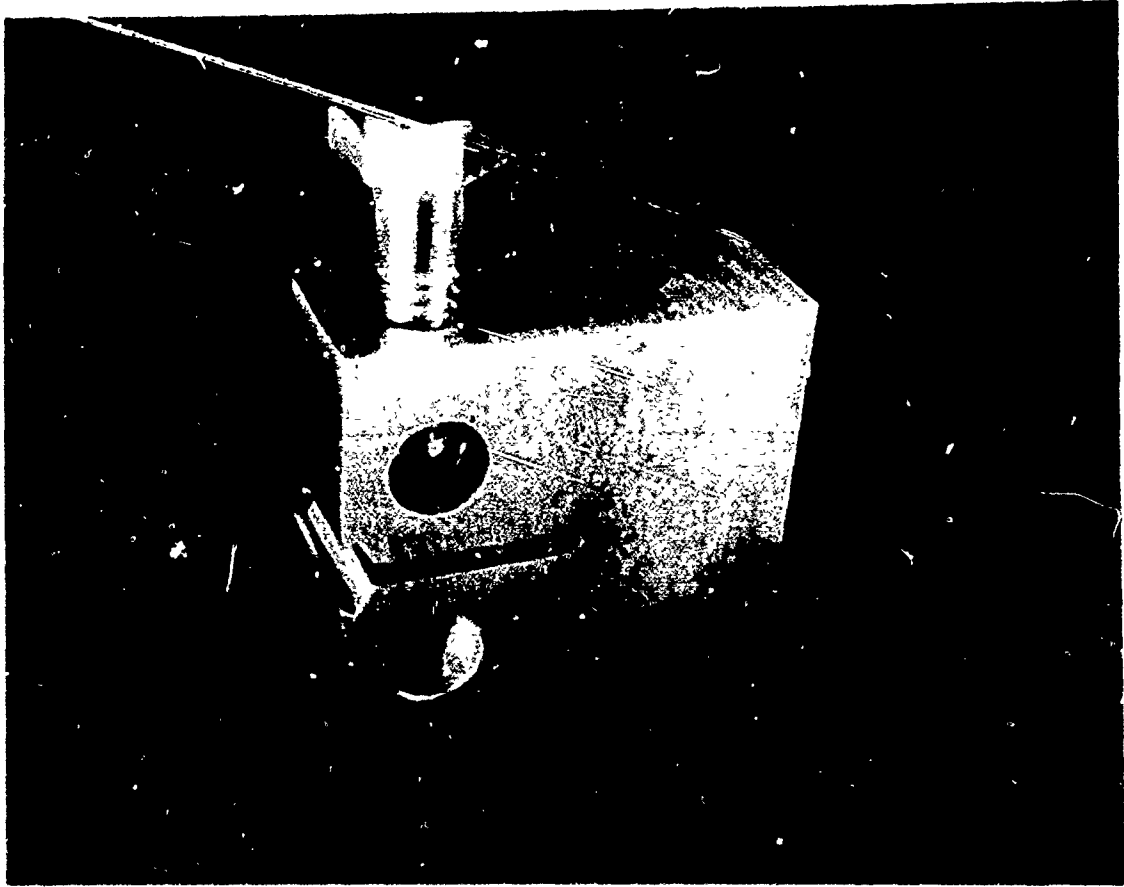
Bolt-Loaded Stress Corrosion Cracking Test Sample.
